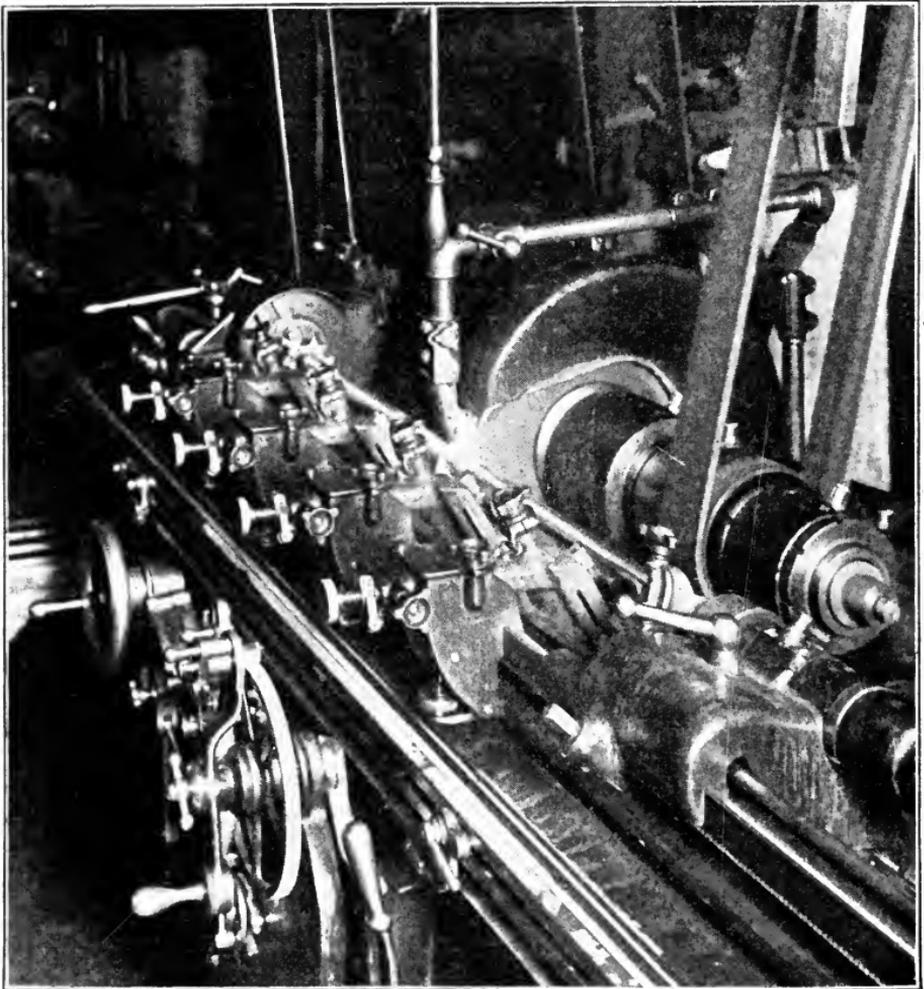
Example of Steady Rests as Employed by Norton Grinding Company
